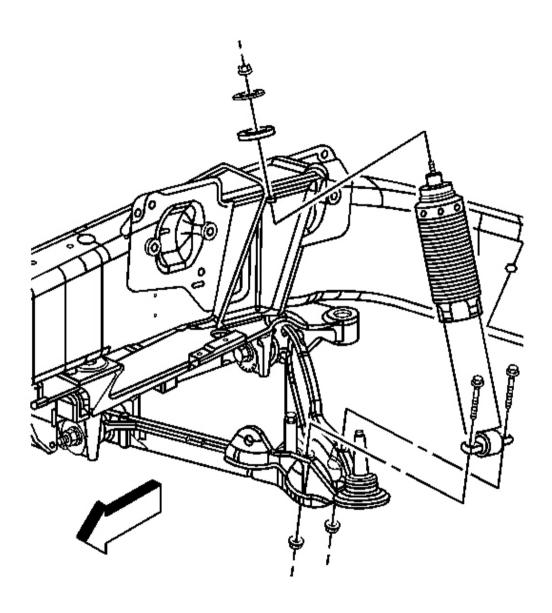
Shock Absorber Lower Mounting Bolts & Nuts Courtesy of GENERAL MOTORS CORP.
